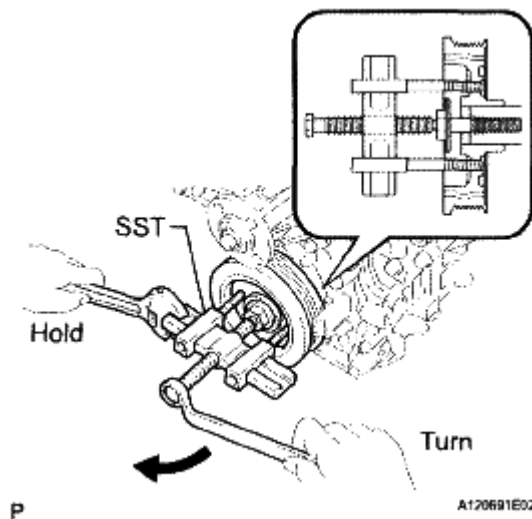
Using SST To Remove Crankshaft Pulley Bolt & Crankshaft Pulley
